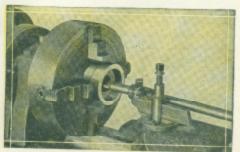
Making a Large Bushing Held in a 4-Jaw Independent Chuck.
